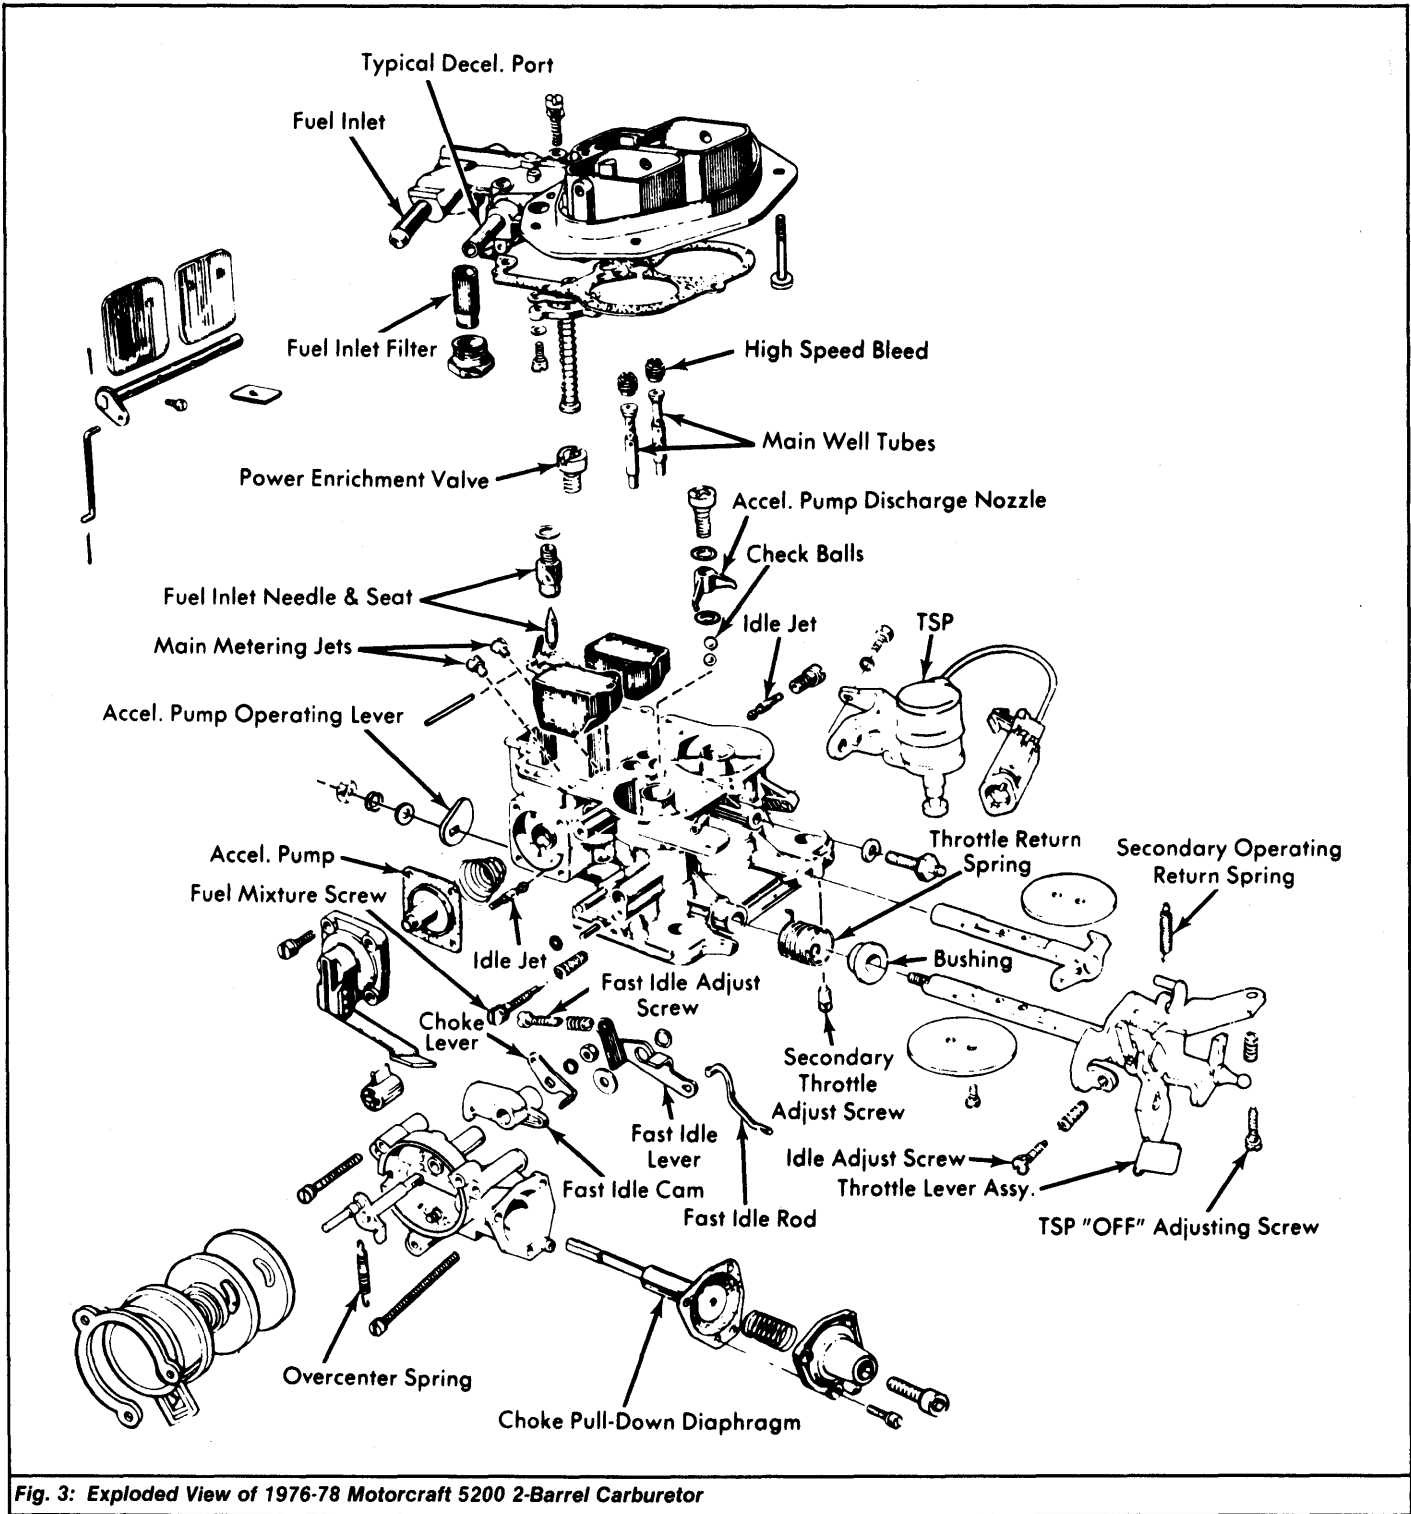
Exploded View of 1976-78 Motorcraft 5200 2-Barrel Carburetor
